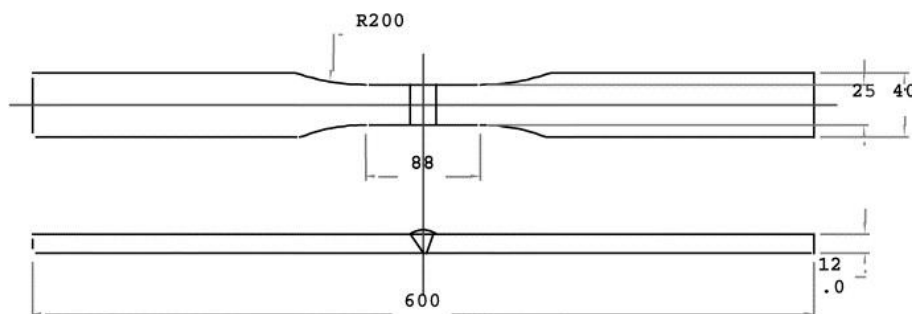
Specimen for fatigue test of butt weld [28]
